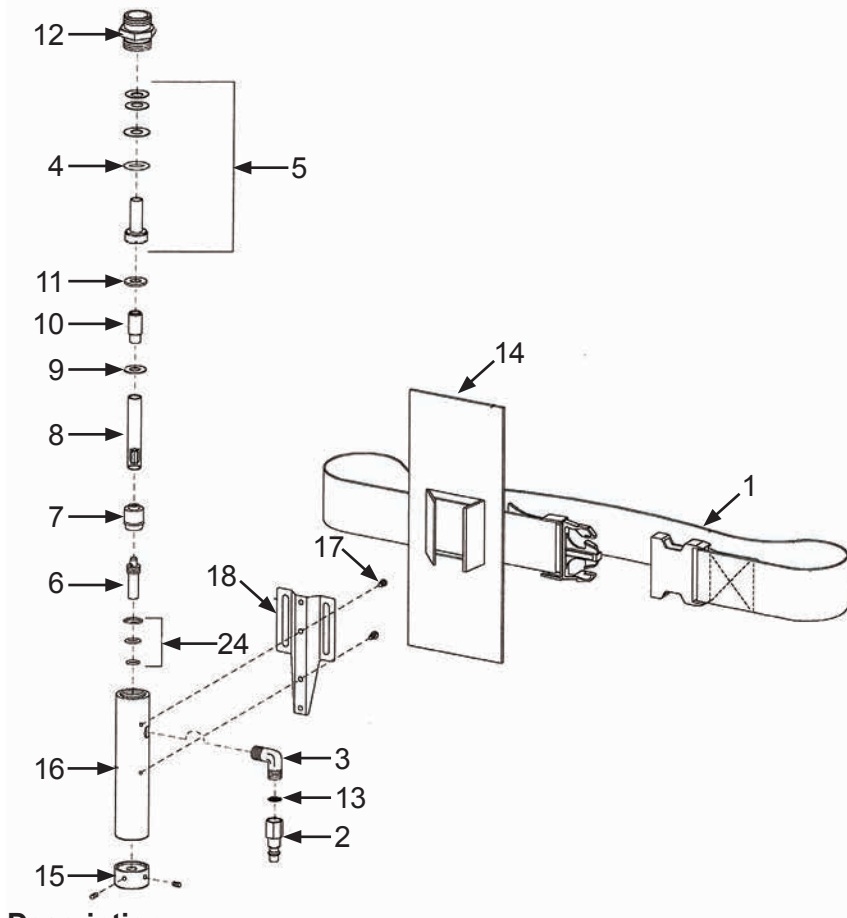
Apollo Clem-Cool Air Conditioner with Belt
